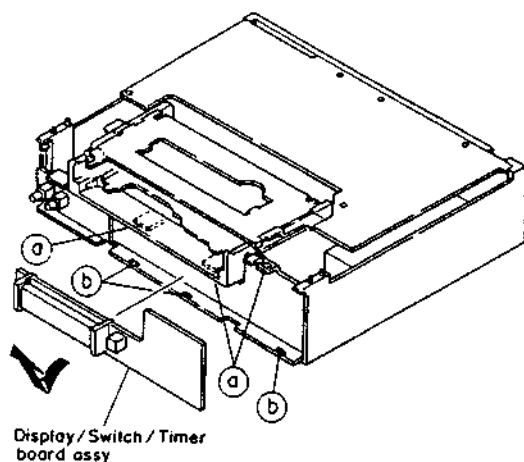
TIMER/DISPLAY/SWITCH board assembly
